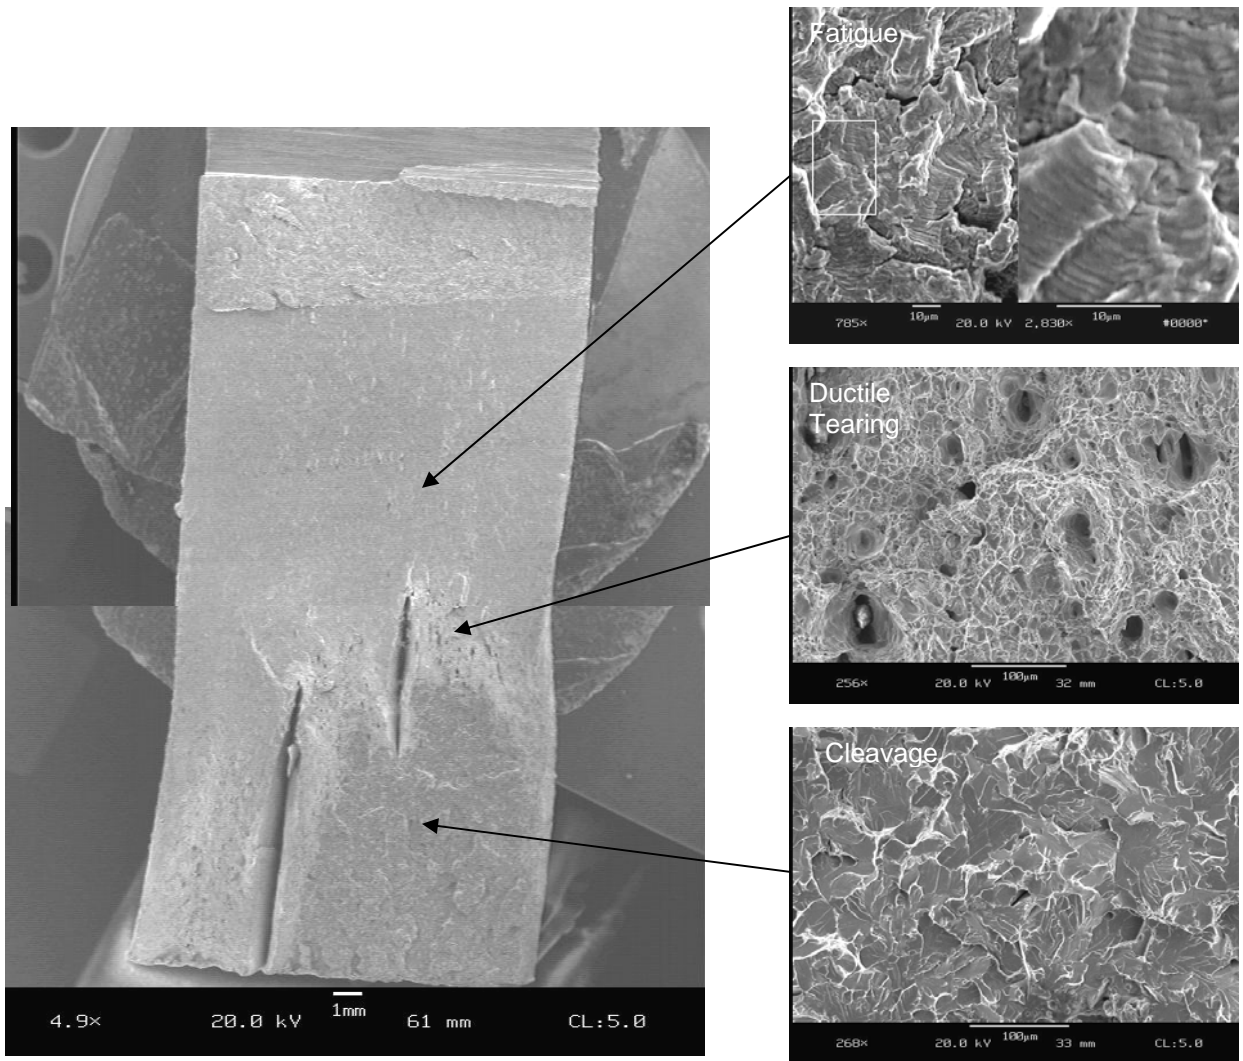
SEM Images of Web Crack Tip Showing the Arresting De-laminations and Fracture Mechanism Details.
